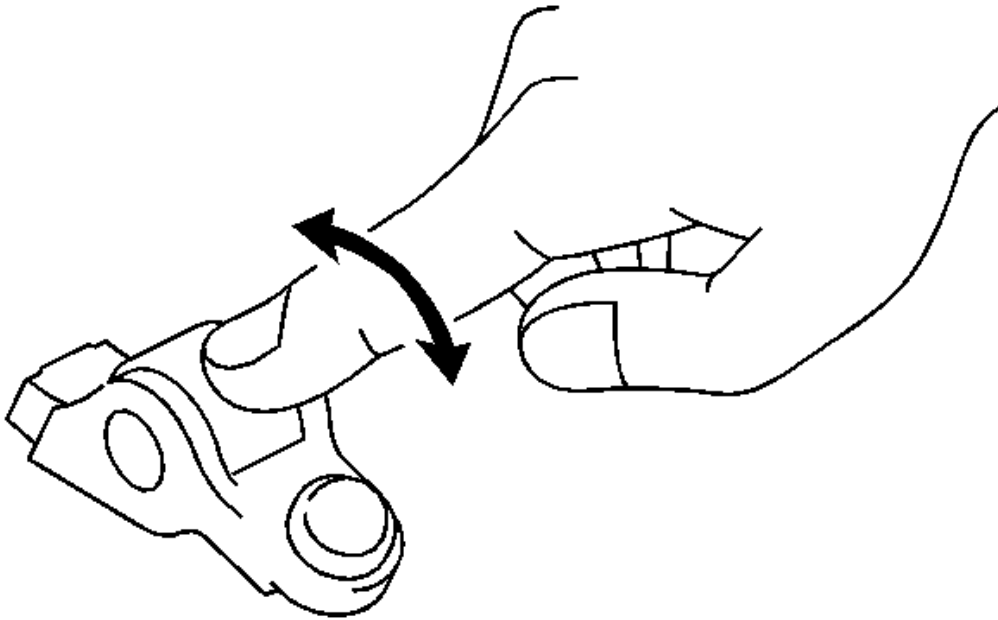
Inspecting Valve Rocker Arm Subassembly
